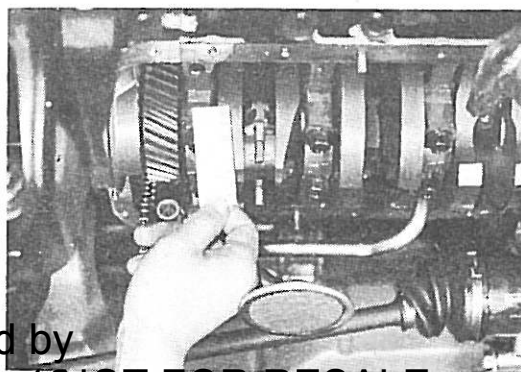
Measuring Connecting Rod Bearing Oil Clearance
